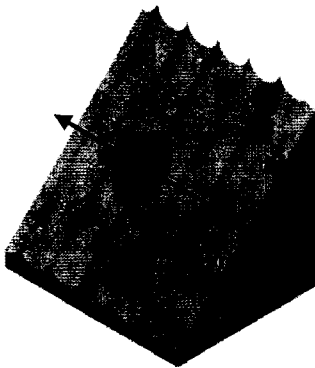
Pre-machined workpiece geometry in complex geometry machining
